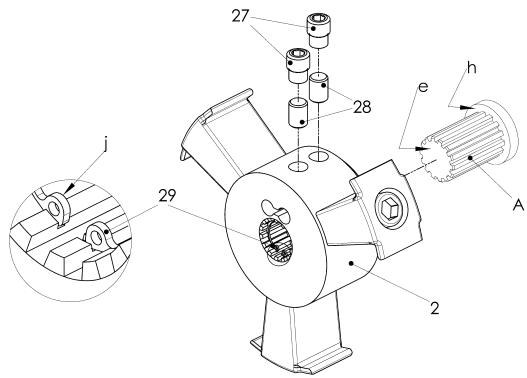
Mounting the hub assembly (2) with CENTALOC clamping
